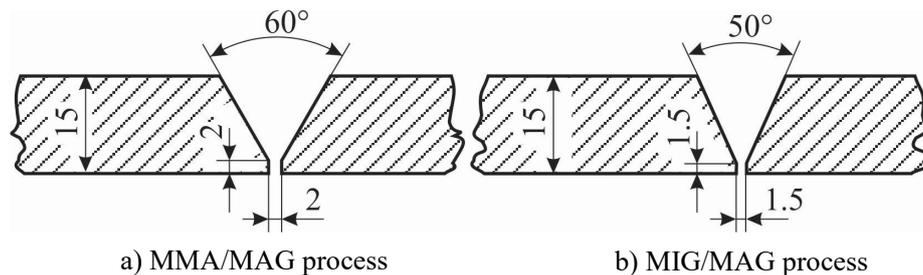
V-grooves for welding of 15 mm S690QL steel plates
